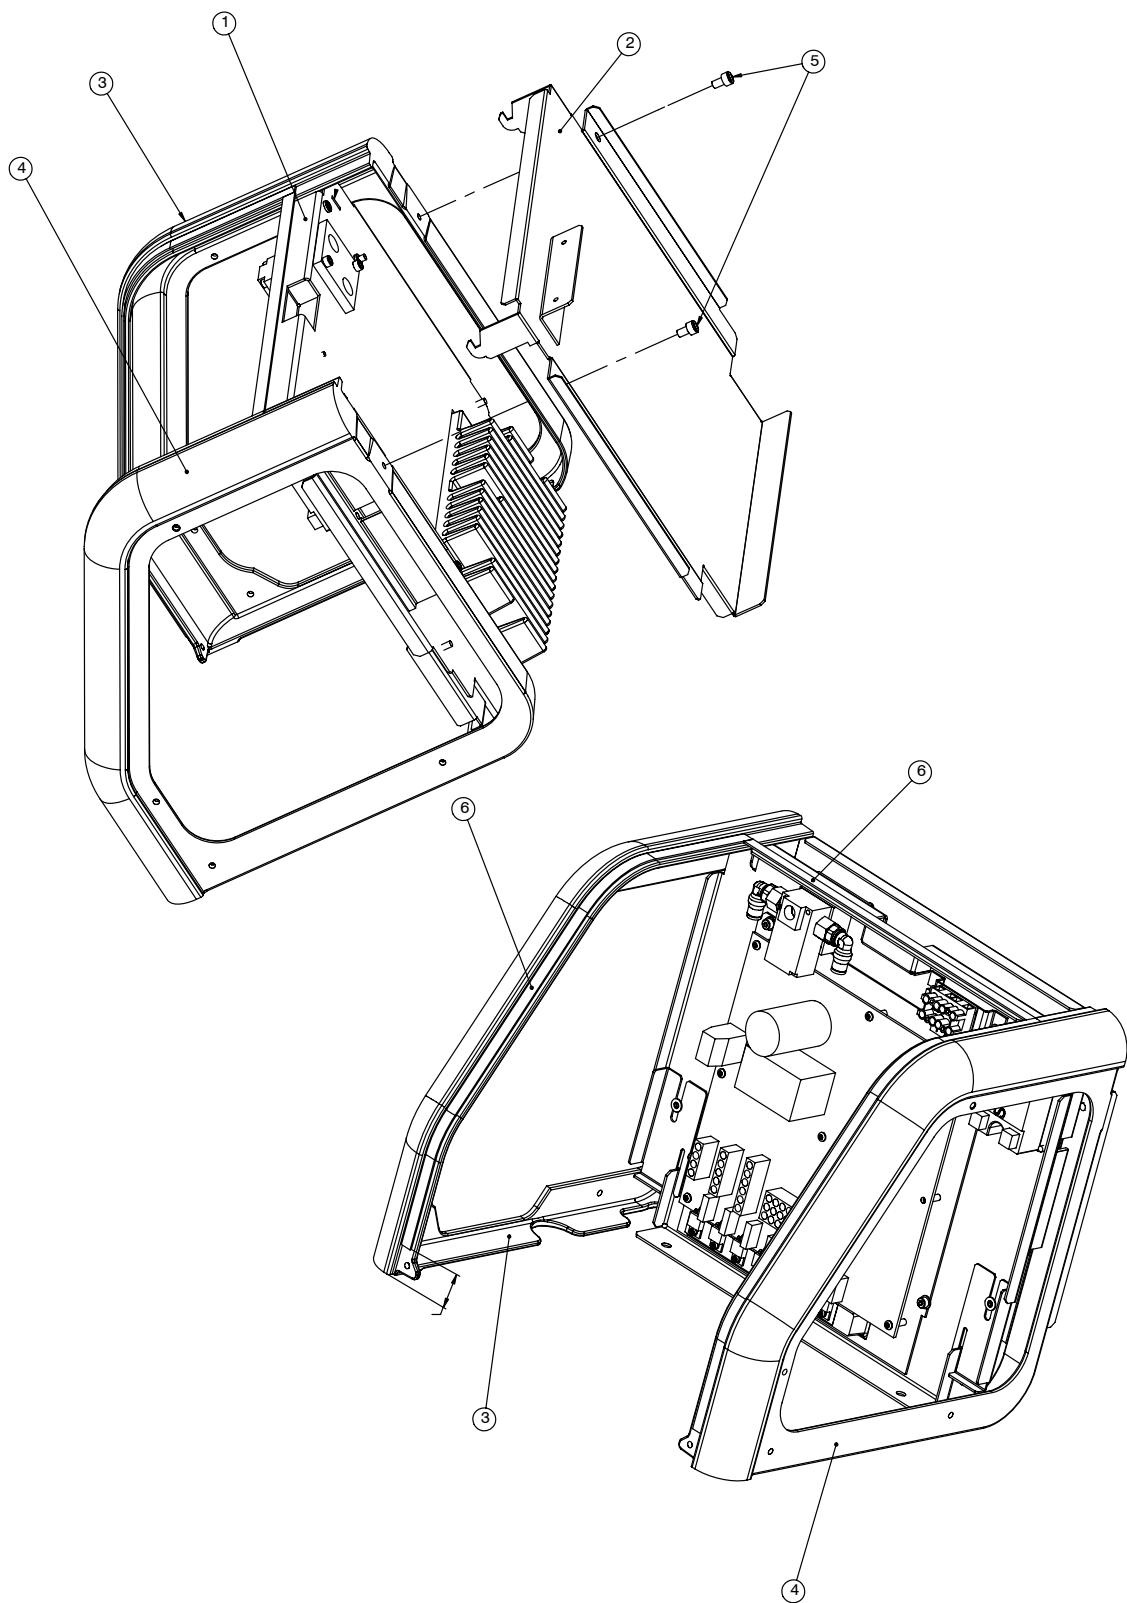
Frame parts, 200–240V or 400/230 Y
